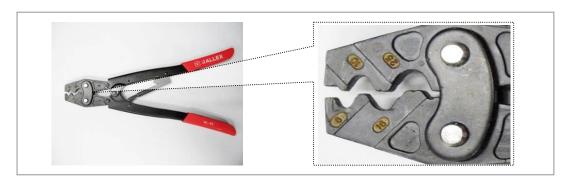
Fixing Pressure Terminal_Handheld Compressor (2)
